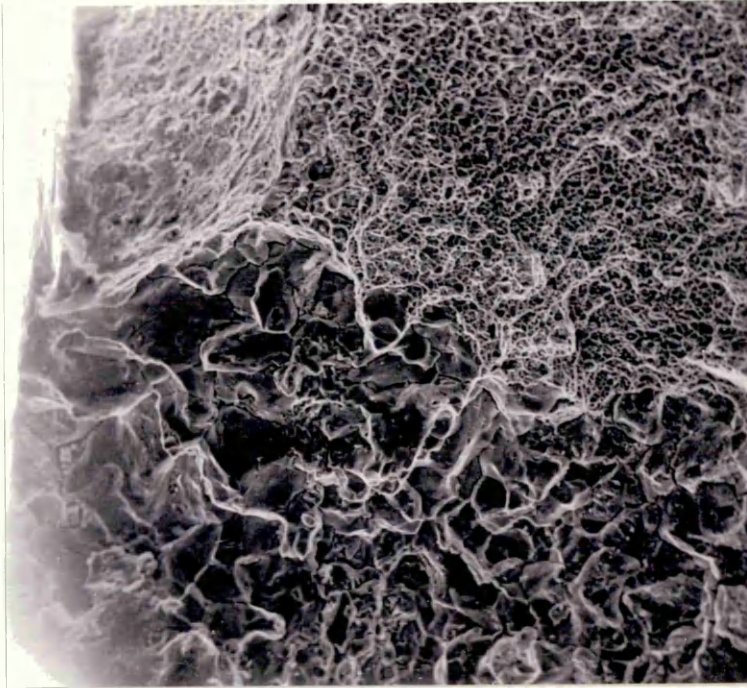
Weld Metal Environmental Fracture Showing Incipient Cracking through Original Prior Austenite Grain. A  $\text{TiS}_2$  inclusion is also visible.
